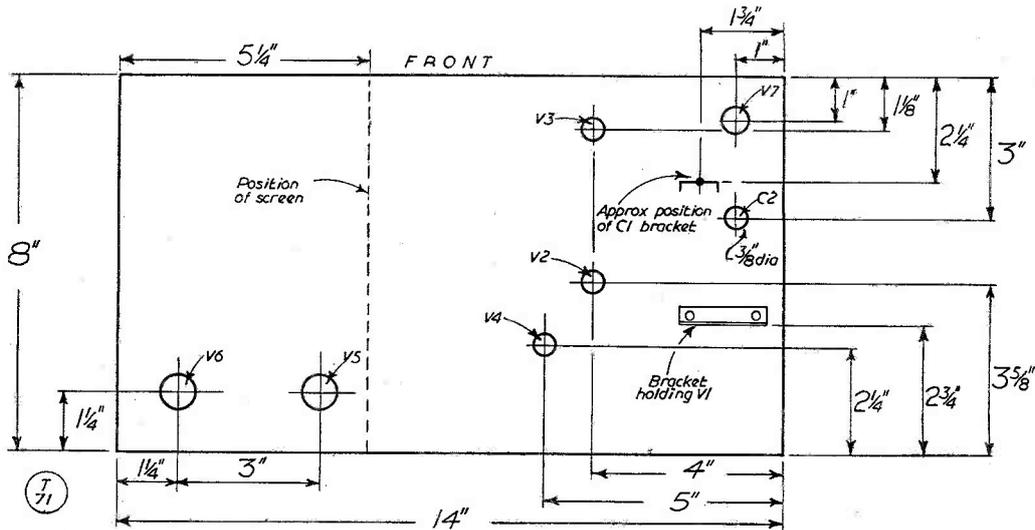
Chassis drilling for the 14/21 mc Table Topper, which can be related to the half-rear view photograph. If the dimensions are carefully followed everything will fall nicely into place.
